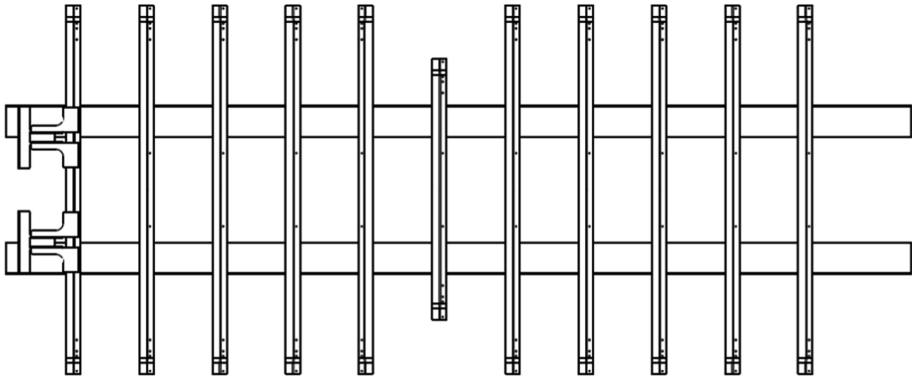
Example of a frame, top view, consisting of two longitudinal beams and eleven cross members.
